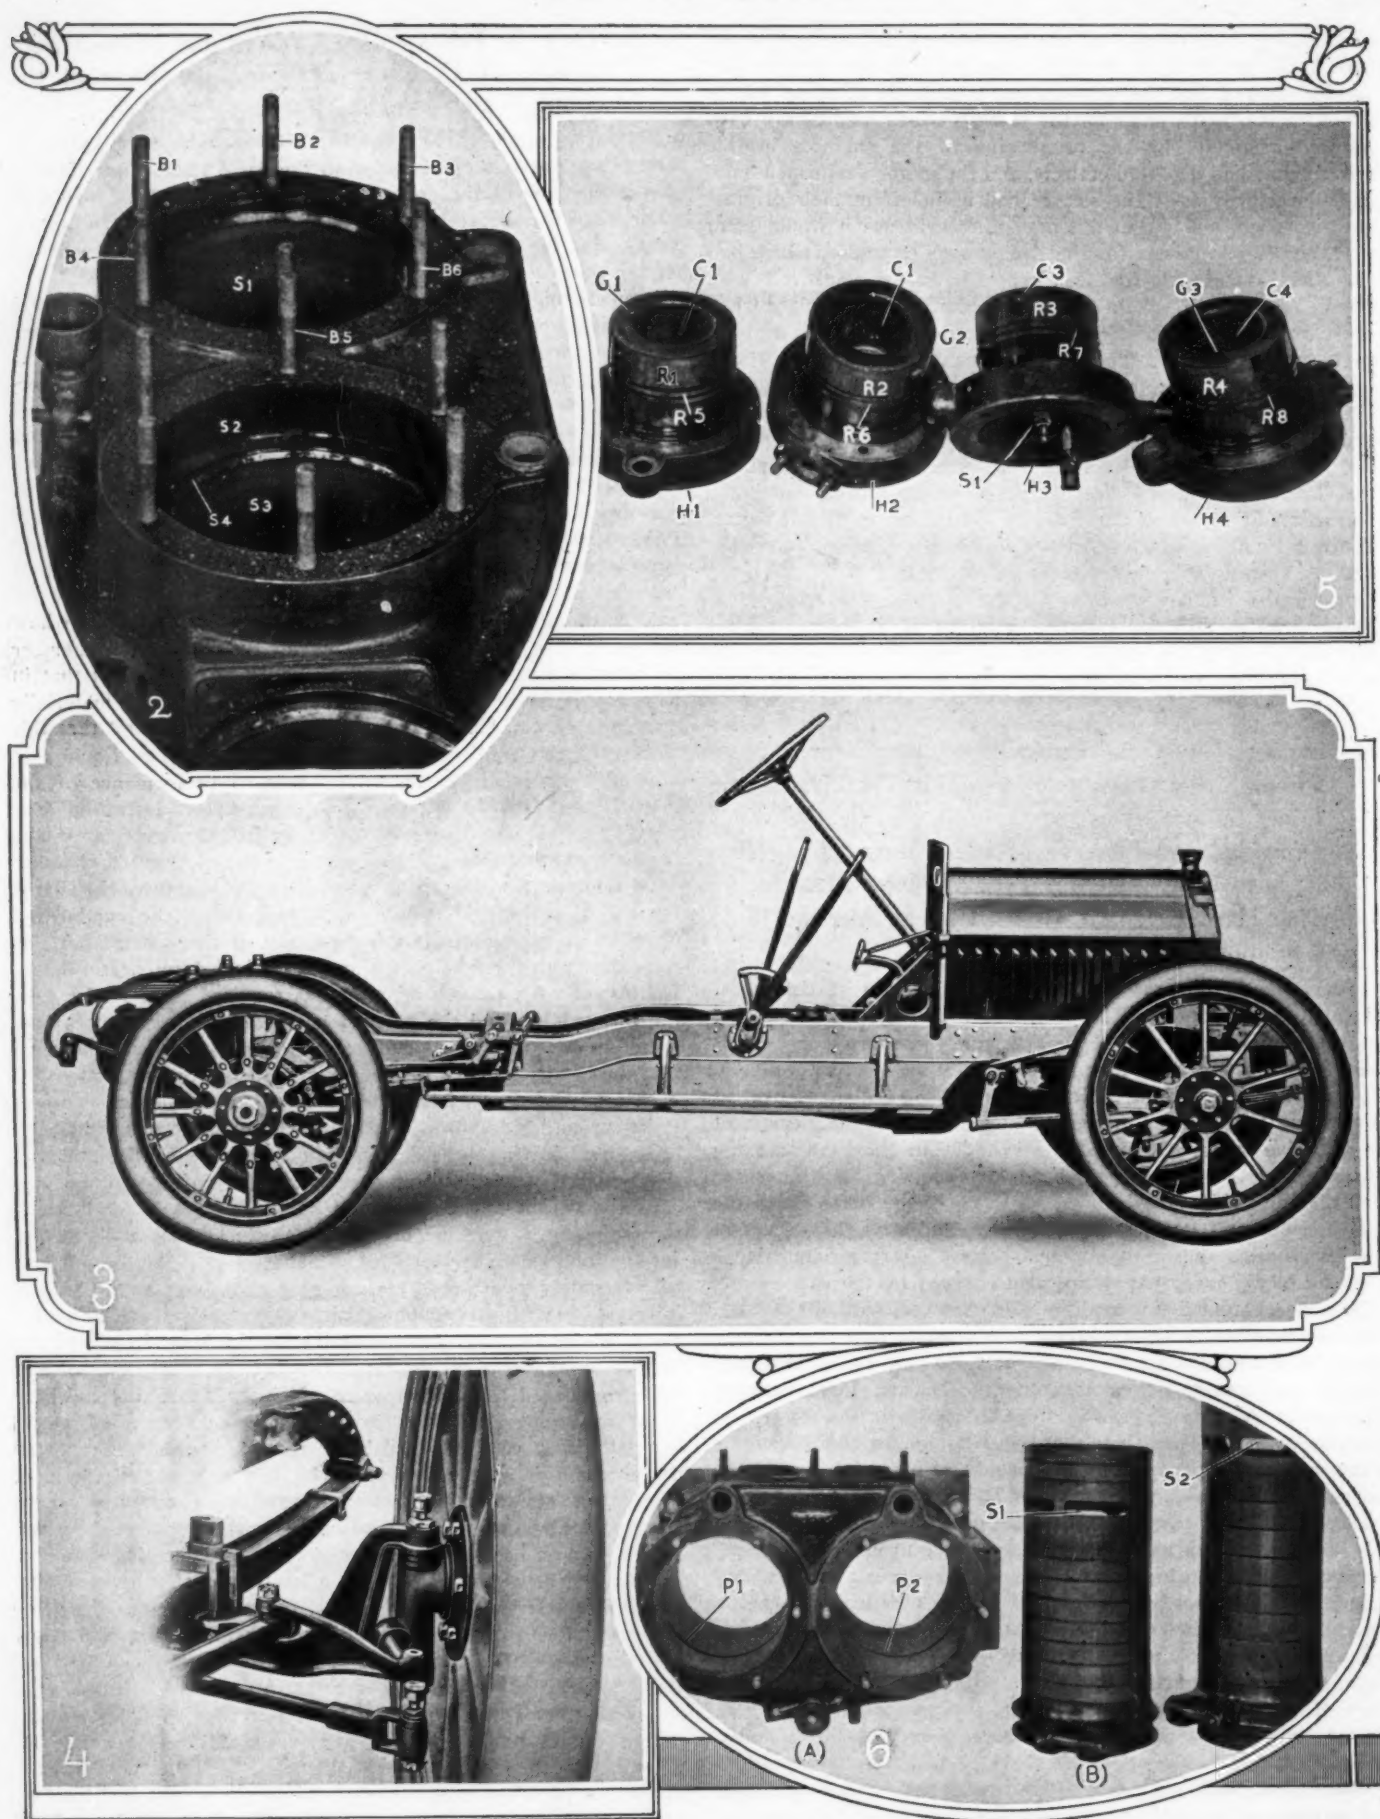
Showing one pair of cylinders with the sleeves in place and the heads removed indicating the condition of the bearing surfaces at the expiration of the test
